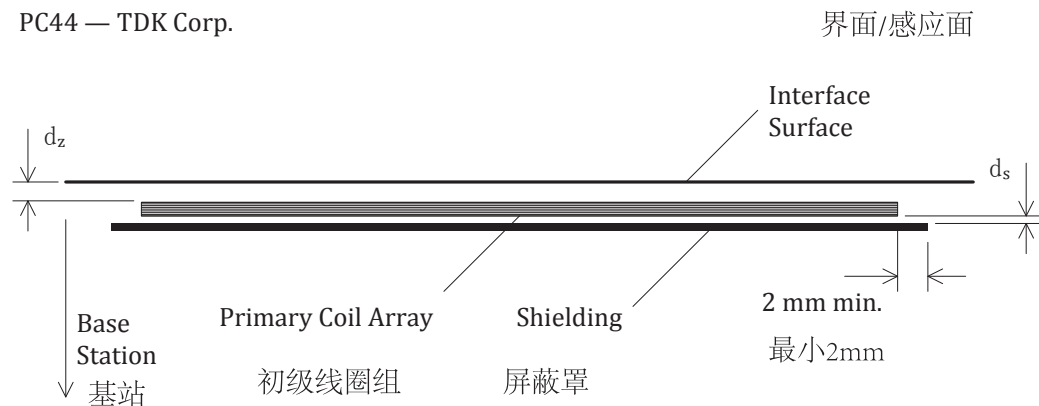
Primary Coil array assembly of Power Transmitter design B1
